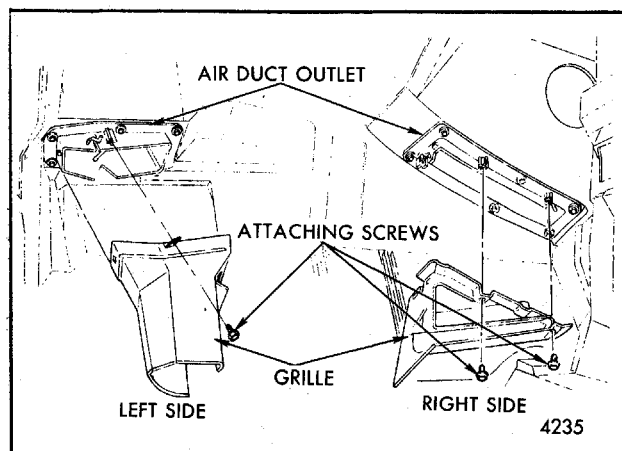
Low-Level Air Outlet Grilles - "E" Styles ("A" Style Similar)
